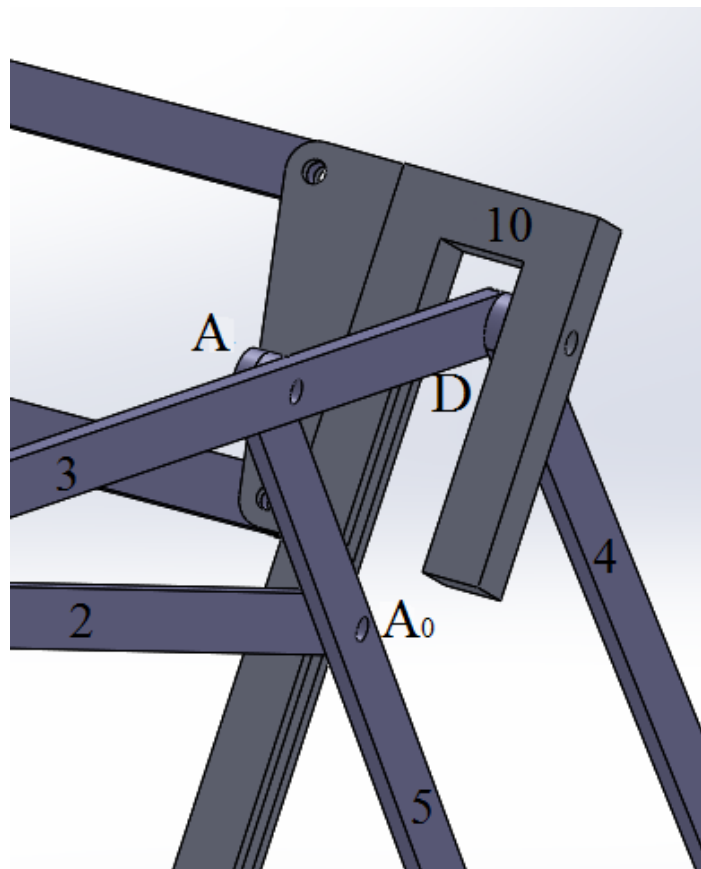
Connection detail of links 2-5, 3-5 and 3-4-10.
